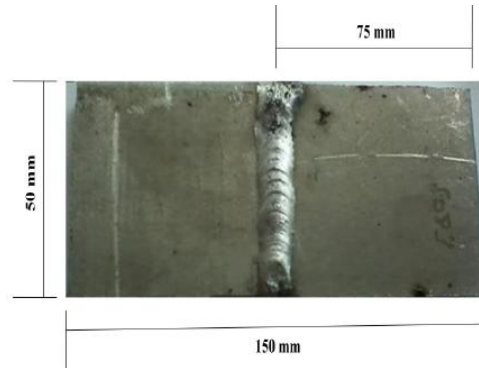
View of Single Butt Joint Welded Specimen
